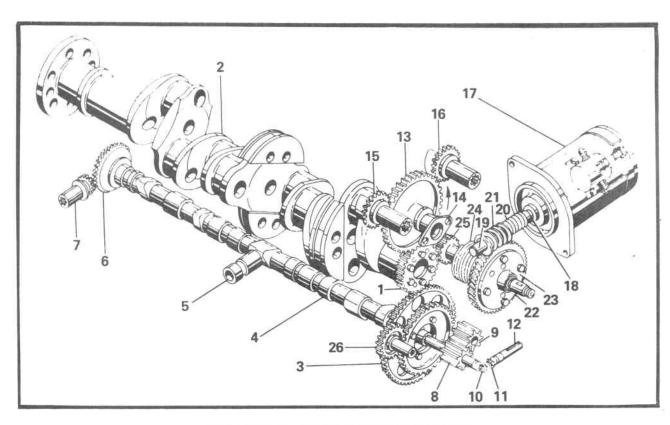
GEAR TRAIN DIAGRAM.
